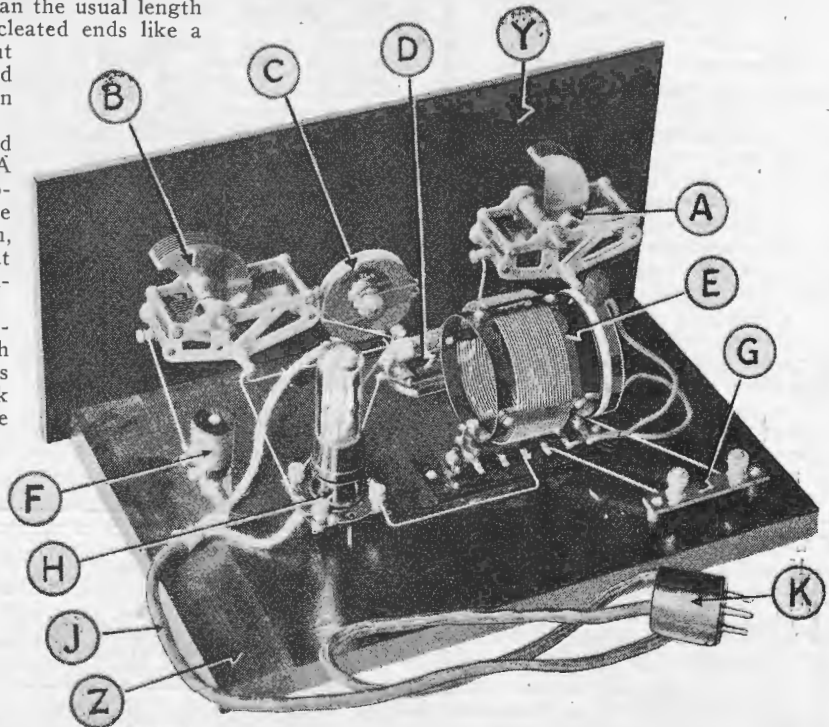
This Back-panel View shows the Layout of the Parts and Disposition of the Wiring.
